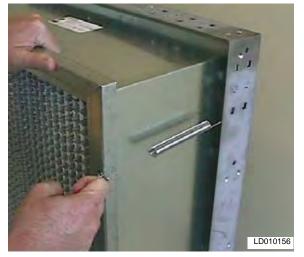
FRAME WITH 4 LATCHES INSTALLED
